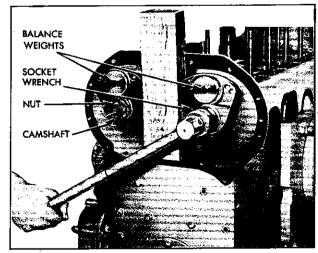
Loosening Nuts (Camshaft—Balancer Shaft) with Standard 1½" Socket Wrench.
